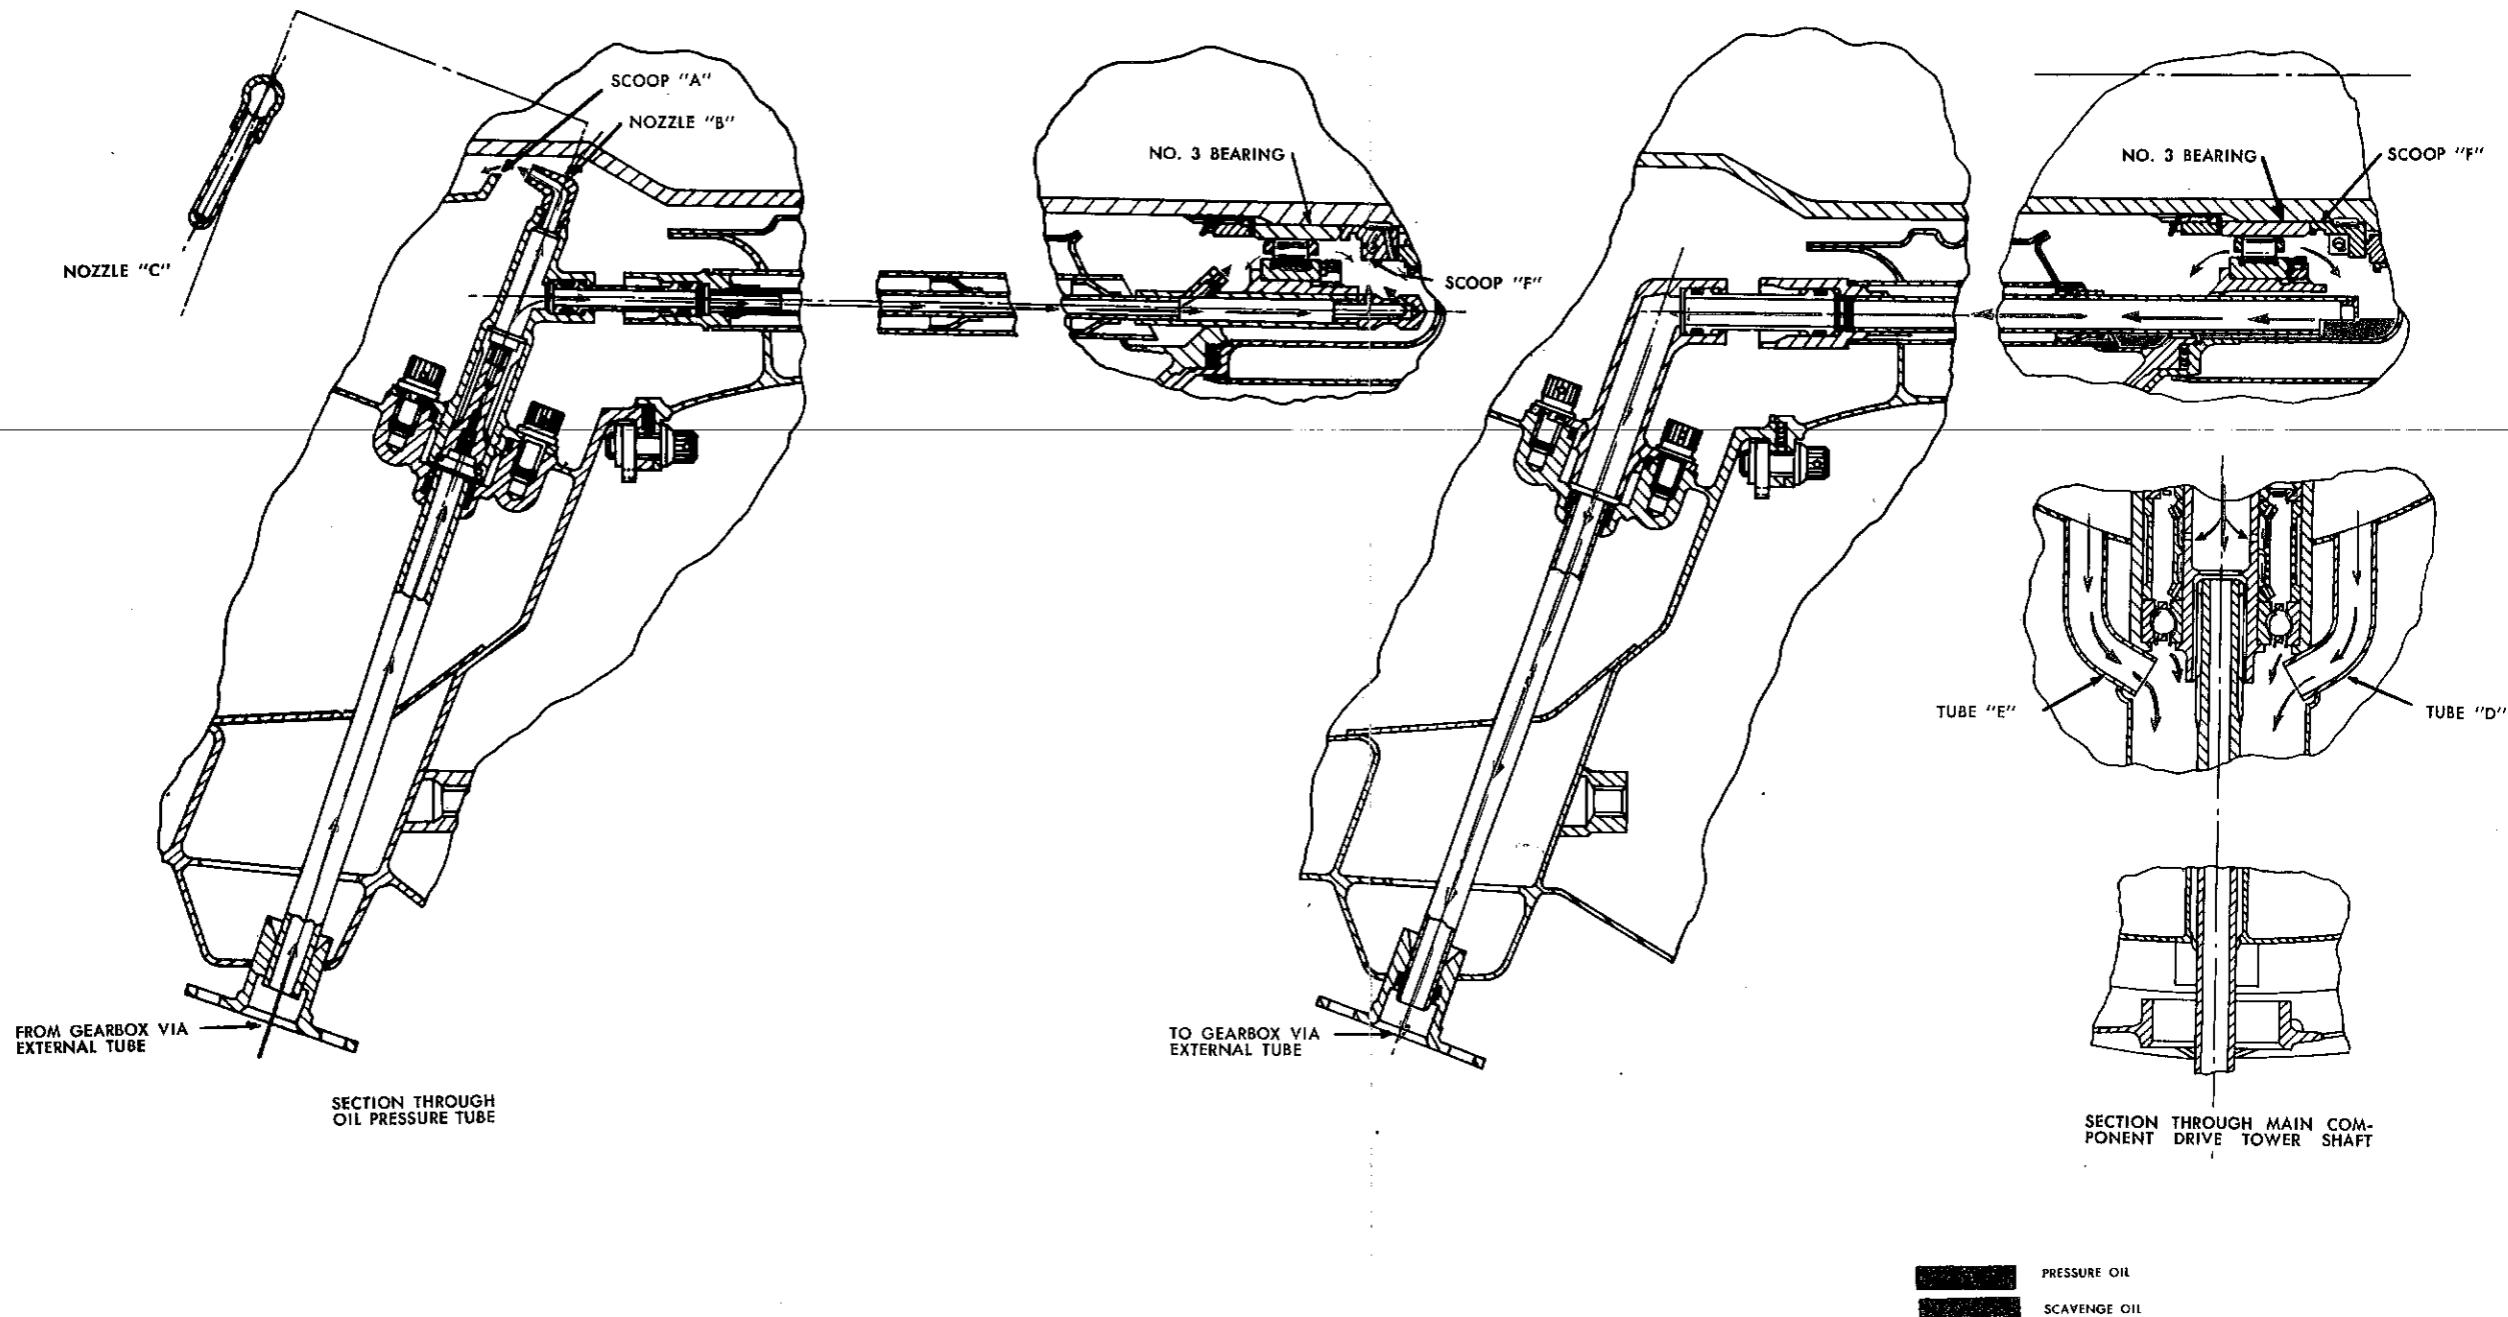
Turbojet Engine Lubrication System (Sheet 2 of 3)
